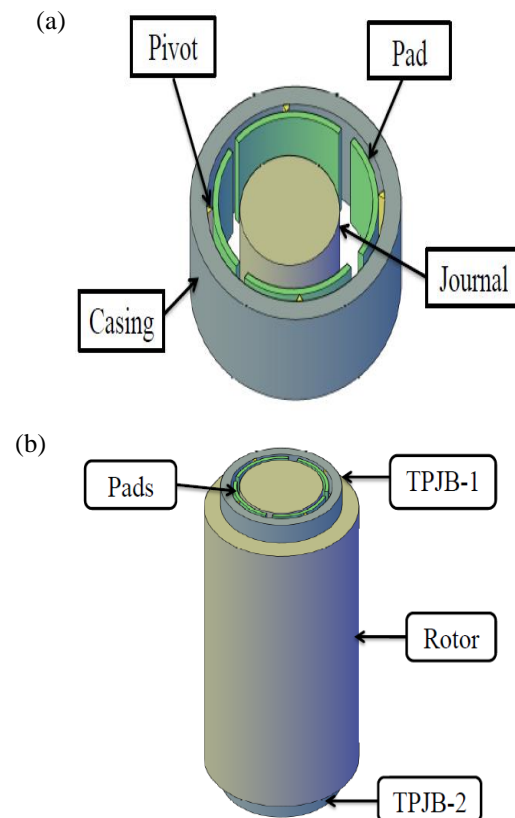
(a) Tilting pad journal bearing representing various parts, (b) vertical rotor supported by TPJB's at upper and lower ends.
